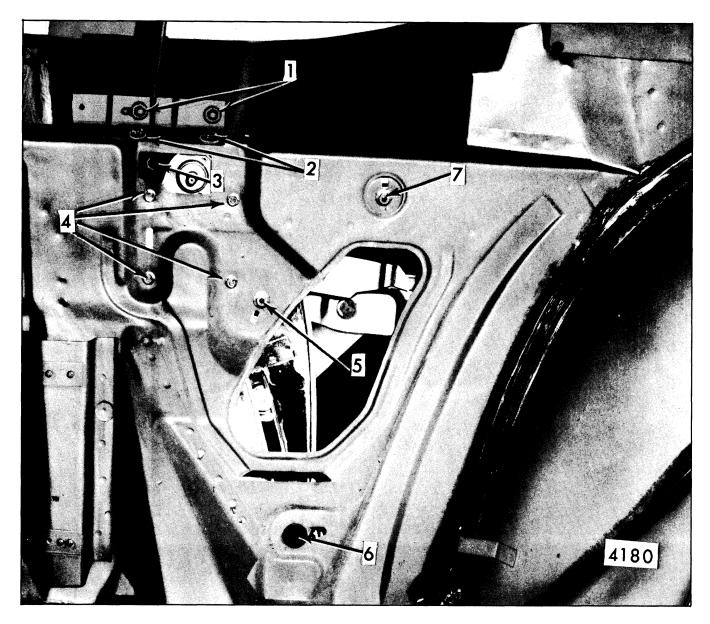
Rear Quarter Hardware - "B and C-47, 57 and 67" Styles
